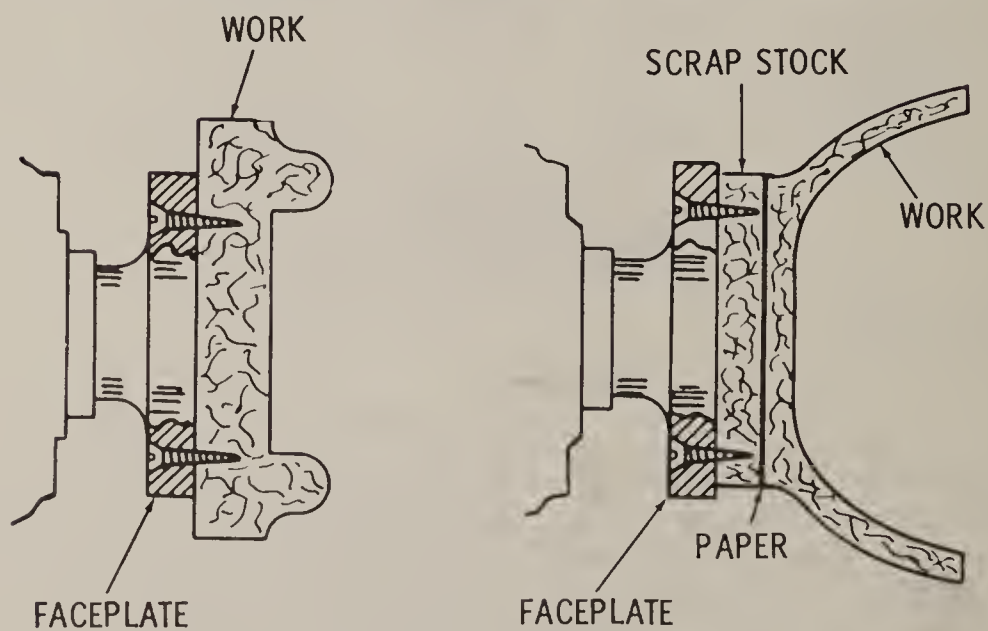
Two methods of mounting work for faceplate turning. (A) The screws are turned directly into the work, (B) Stock may be glued to a piece of scrap for holding purposes.
